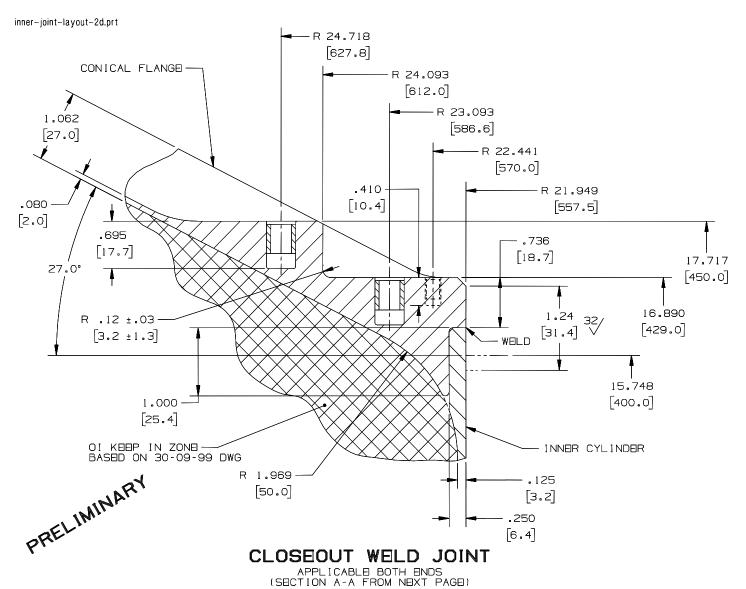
Close-out Weld Joint
